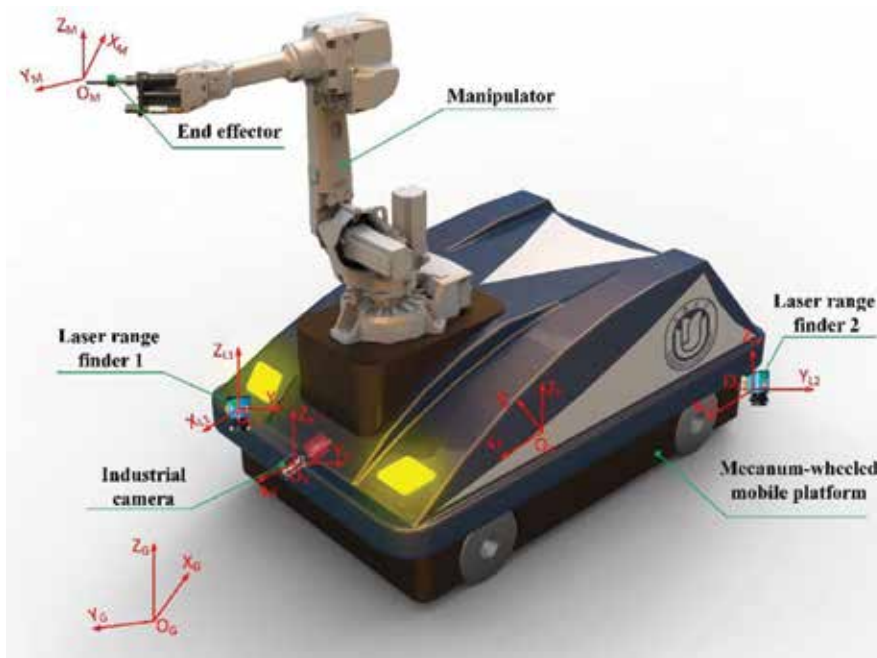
The wheeled mobile manipulator for fuselage drilling/riveting.
